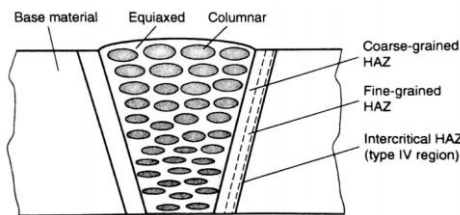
Schematic diagram of a welded joint indicating the three different regions - base or parent material (PM), weld material (WM) and heat affected zone (HAZ).¹
